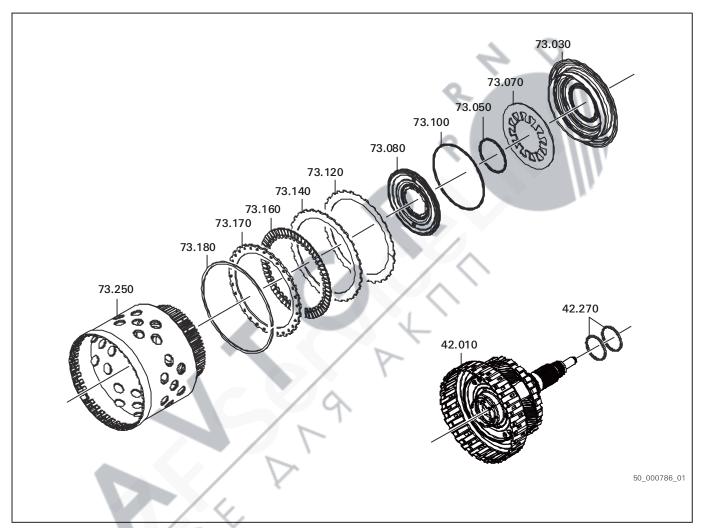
42 - Planetary gearset 4, 73 - Clutch D
